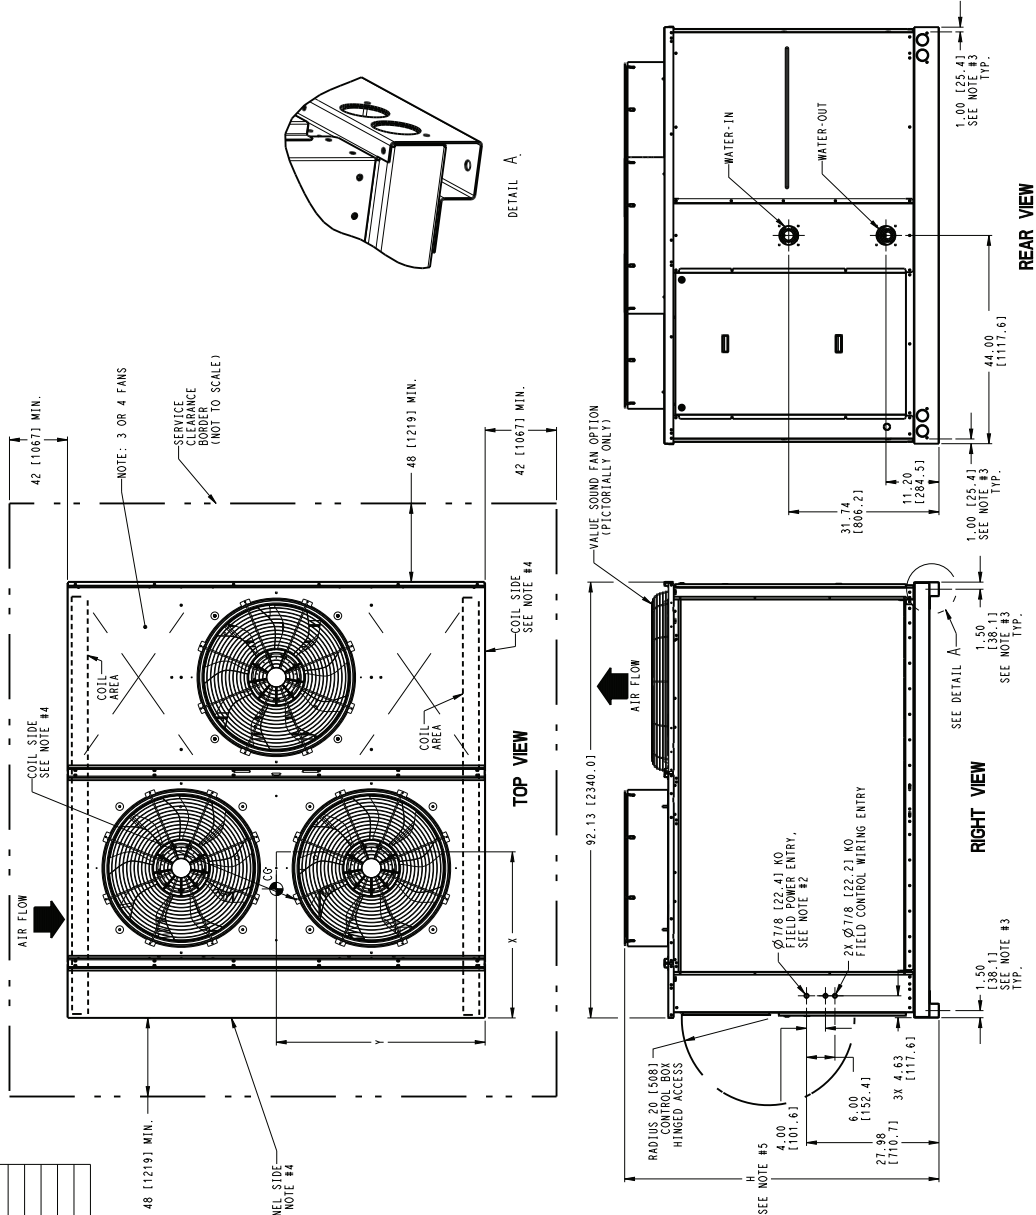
Dimensions — 30RAP035-060 Units with Fixed Speed Fans
